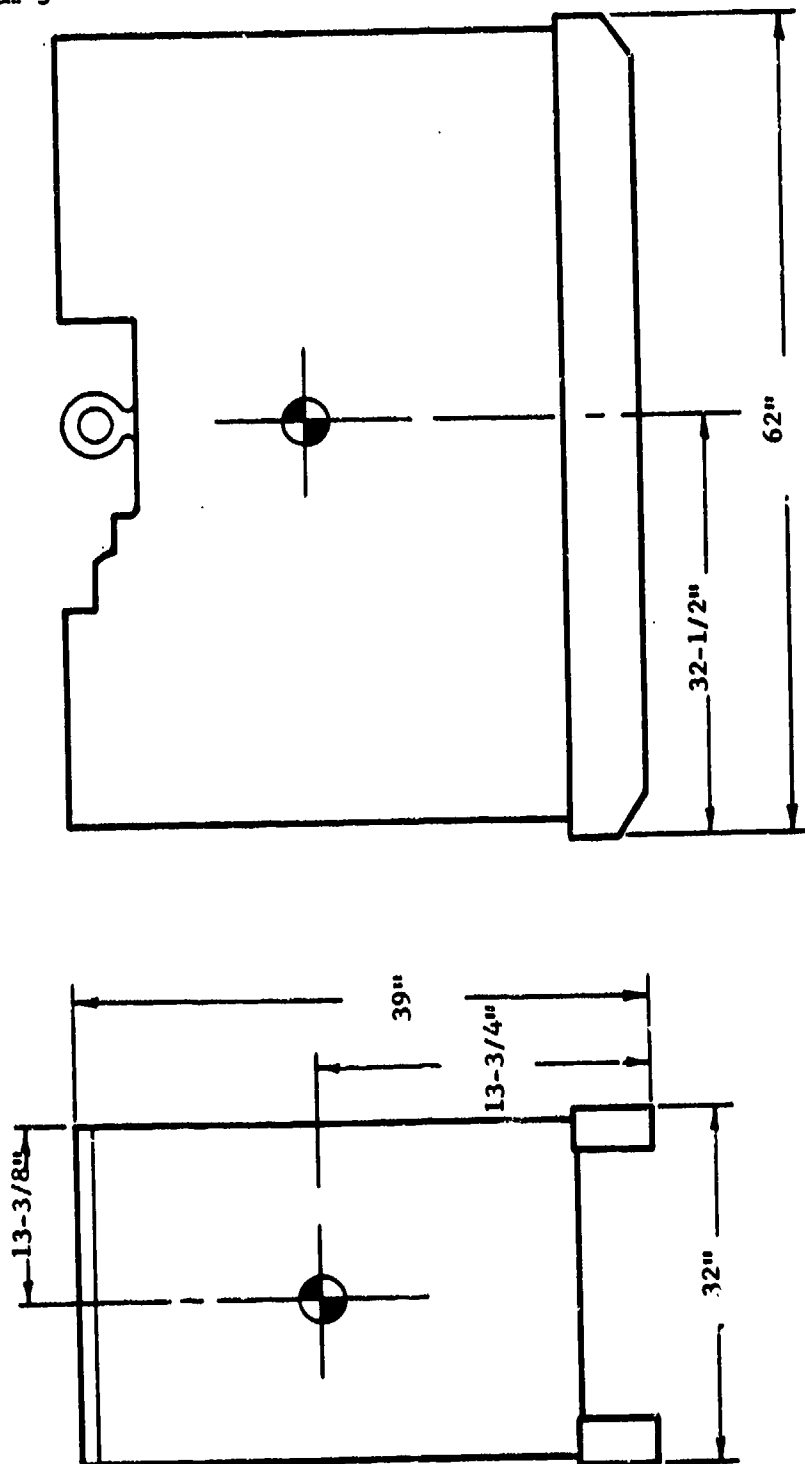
OUTLINE DRAWING SHOWING DIMENSIONS
